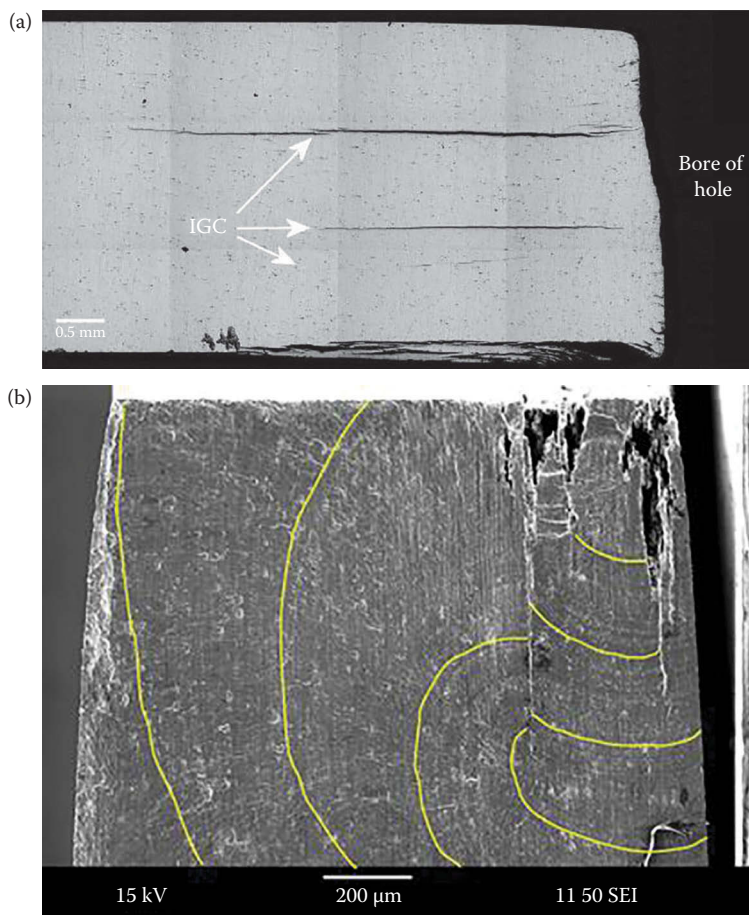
(a) Composite micrograph showing IGC from a fastener hole in the wing skin of an RAAF P-3.^[23] There is also exfoliation present at the skin bottom surface, which was exposed to jet fuel. (b) Fatigue fracture surface from IGC at a fastener hole showing the interaction of the fatigue crack (yellow lines show successive crack fronts) with the IGC fissure
